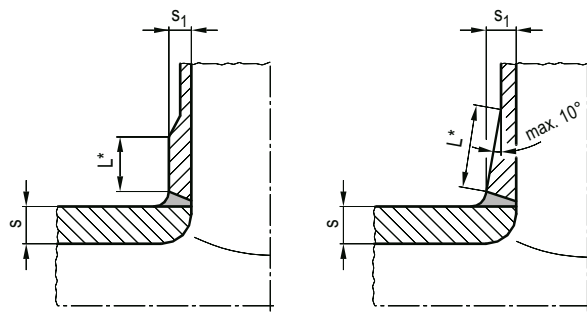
Examples of a design of circumferential and longitudinal welds which is suitable for radiographic testing
